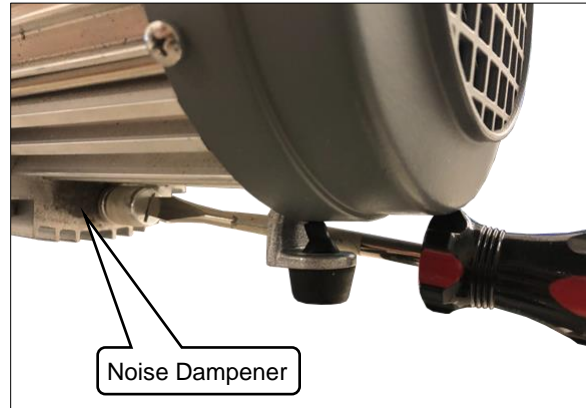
A2000 Pump Vacuum and Exhaust Ports
